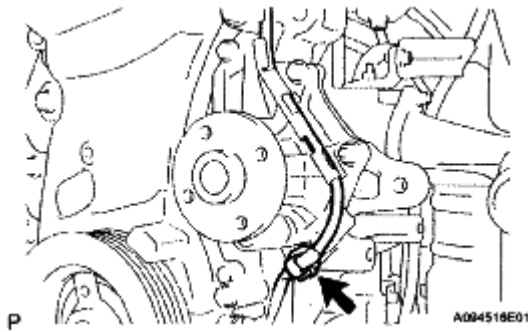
Locating Clamp Of Crankshaft Position Sensor From Water Pump
